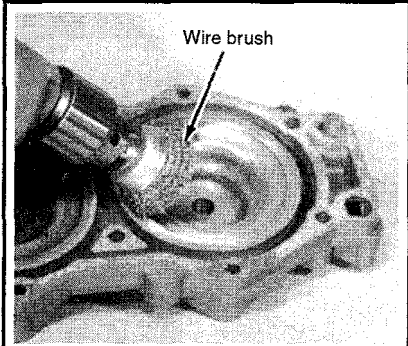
Although a blunt chisel is preferred, a wire brush can be used WITH CARE to clean most carbon deposits
